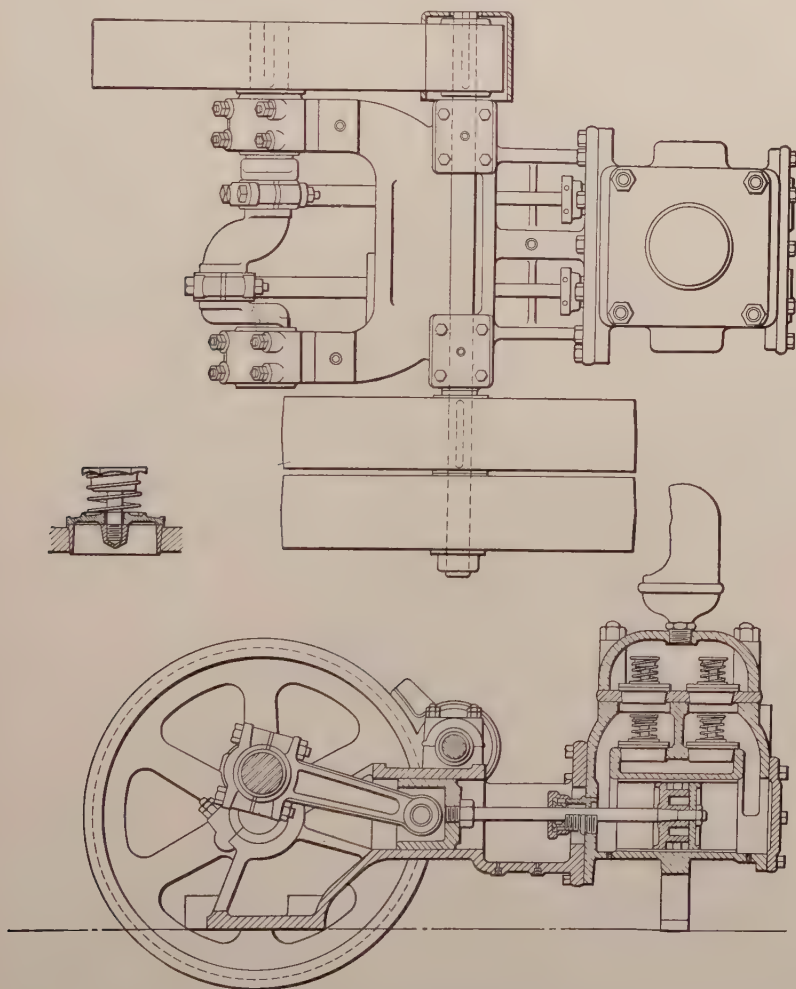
Typical section of Worthington Horizontal Power Pump. Double-acting, packed-piston type.
